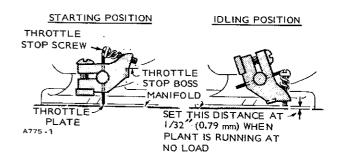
THROTTLE STOP SCREW ADJUSTMENTS
